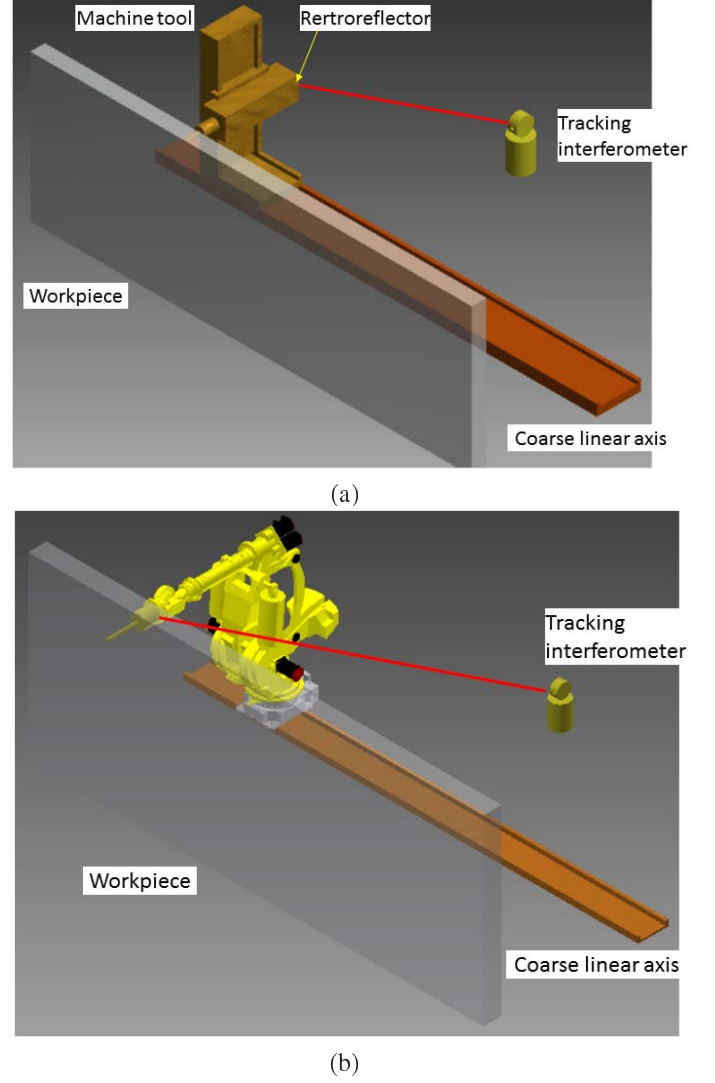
Possible configurations of a large-scale machine tool with a long coarse linear axis under closed-loop volumetric error compensation. a) With a small-sized machine tool. b) With a serial-link robot.
